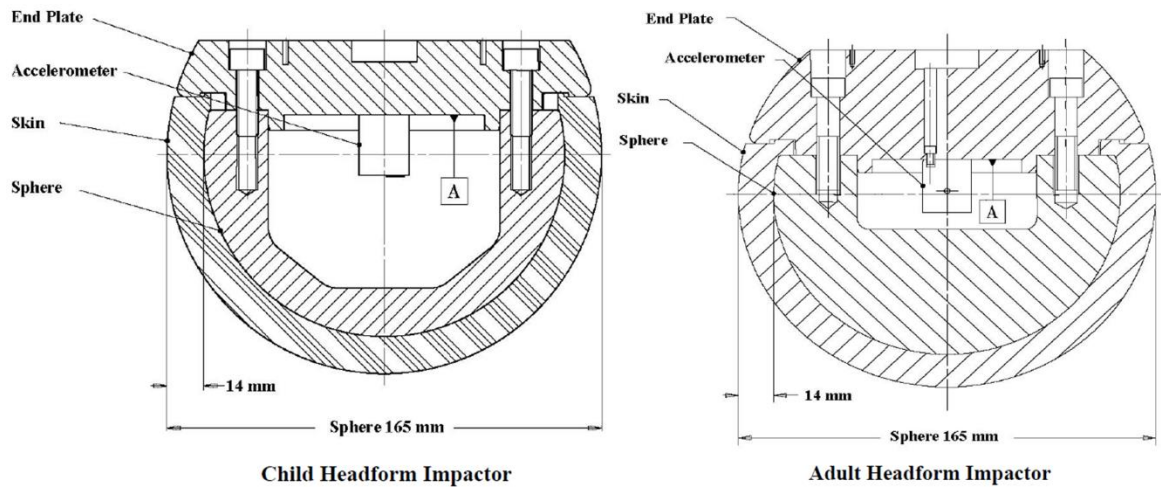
2 Child and Adult Headform Impactor Components & Geometry [3]
